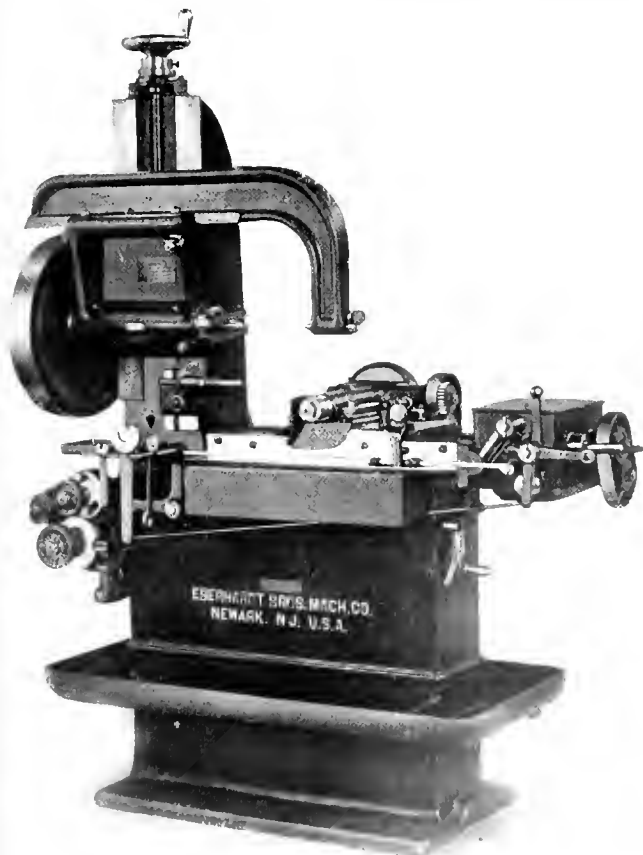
Front View of Eberhardt Bros. Small Automatic Gear-cutting Machine.
